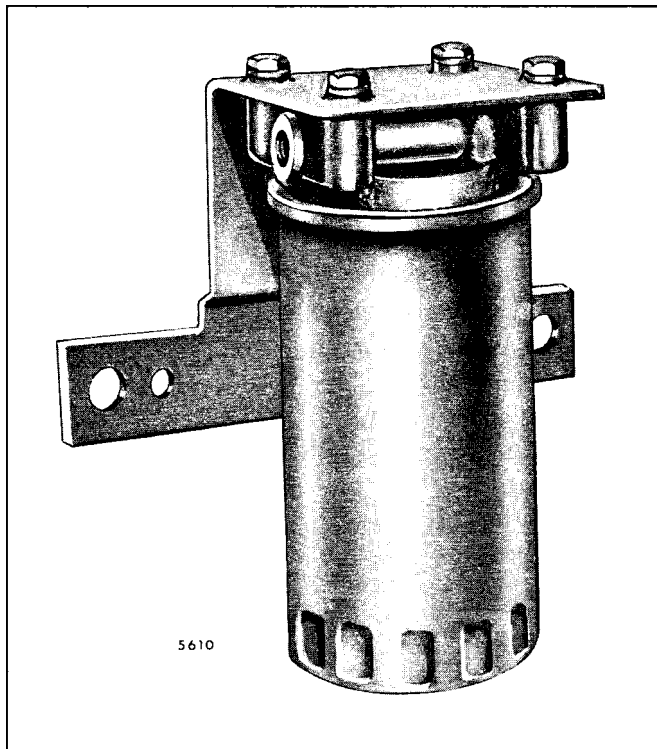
Coolant Filter and Conditioner (Spin-On Type)
